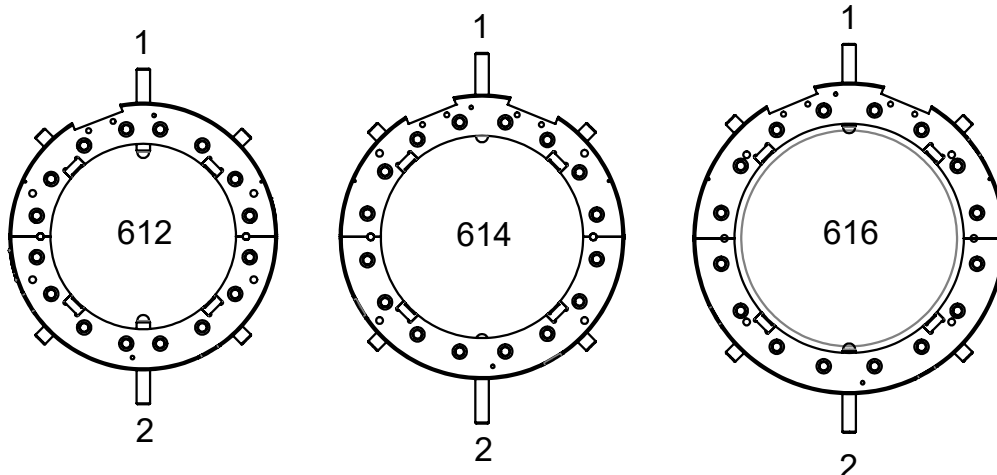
Model 612RBL-G2, 614RBL-G2 and 616RBL-G2 Jackscrews
